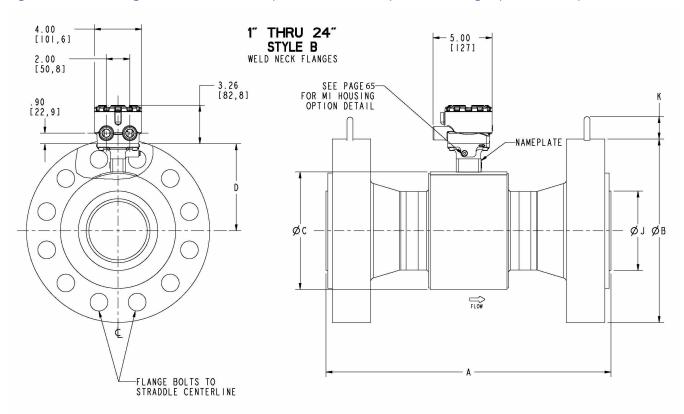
8705-M Flanged Sensor 1-in. to 24-in. (DN 25mm to 600mm) weld neck flange—(P ≤ Class 2500)
